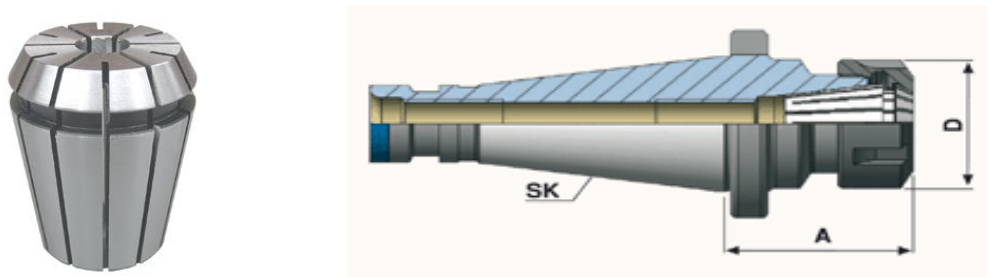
Example of a collet. (Machine Tool Accessories & Machine Work, 2008) Left: an example of a collet. Right: An example of an external collet with its conical outer surface and inner cylindrical surface.
